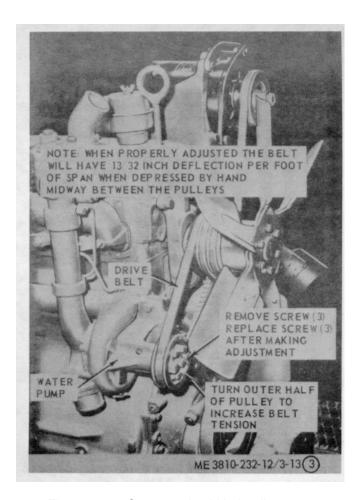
Crane engine V-belt adjustment. Sheet 3 of 3
